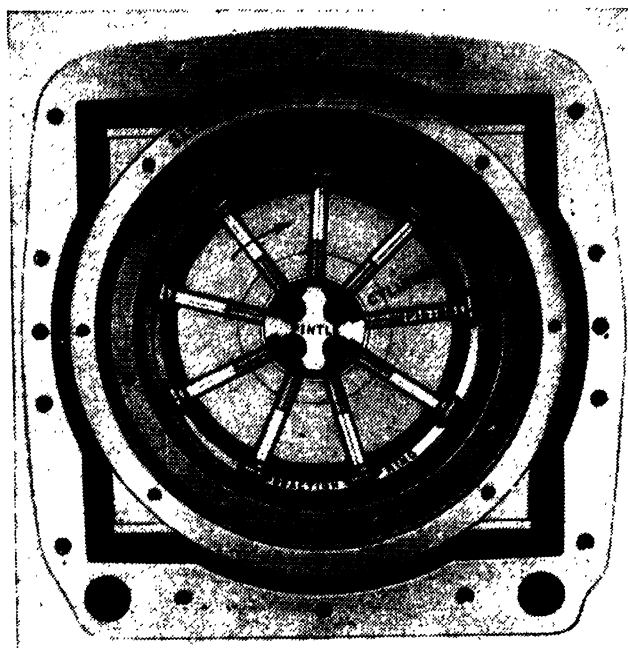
Neutral position of Oilgear pump. (*The Oilgear Co., Milwaukee, Wis.*)
